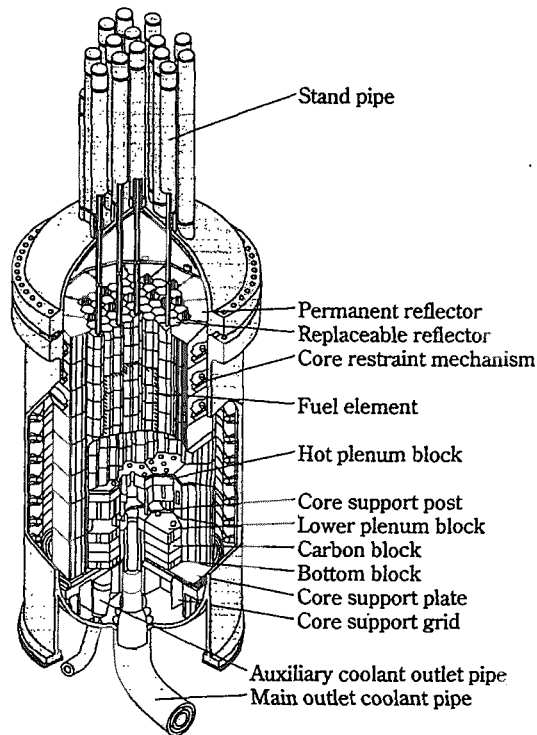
Cutaway drawing of HTTR core ⁴⁾.
